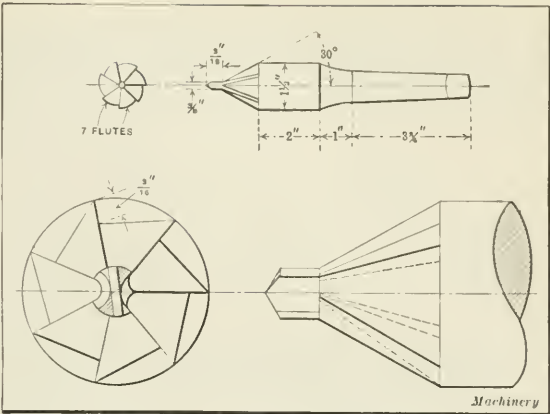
Close View of Re-centering Tool and Enlarged View of Point
